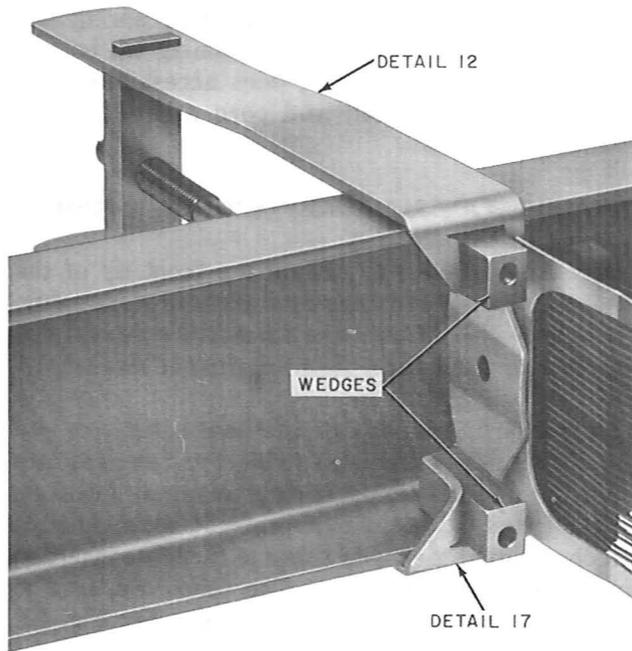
Detail 12 Wedge Support, Detail 17 Wedge Support, and Detail 1 Wedge Support Assembly
